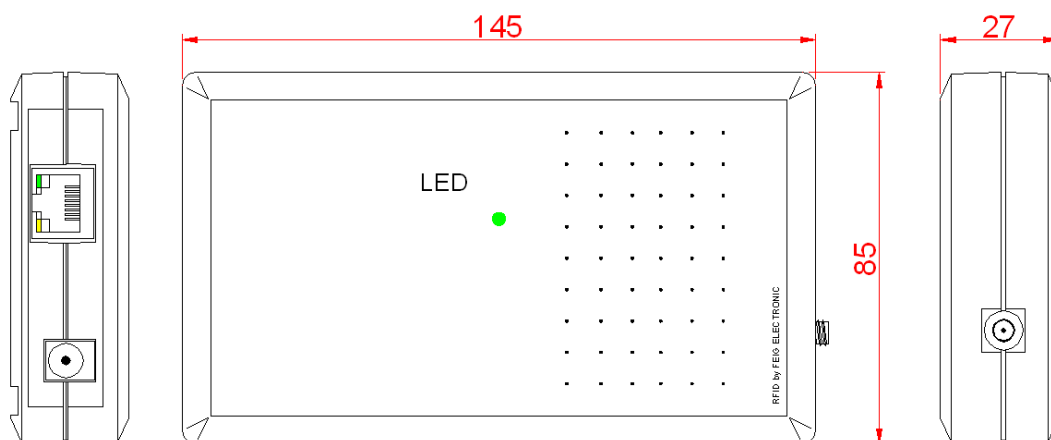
Dimensions of the housing version (all dimensions are in mm)
